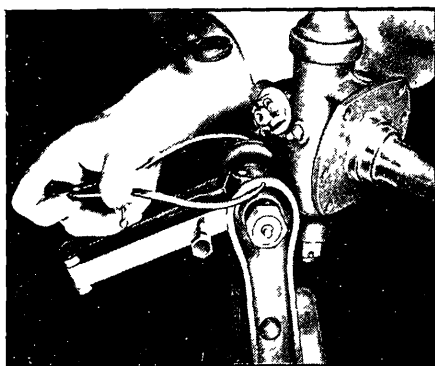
1950-52. Using calipers and spreader tool to establish proper spread of outer ends of lower control arm
